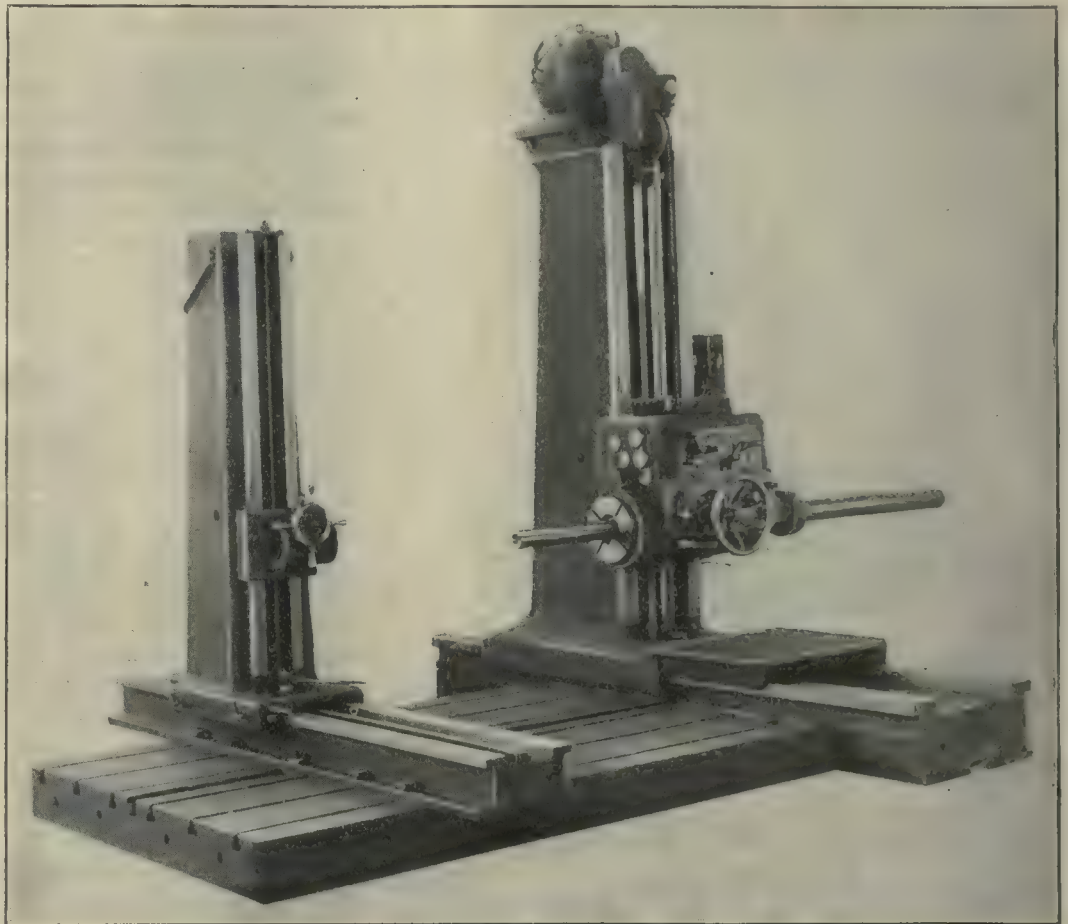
HORIZONTAL BORING, MILLING AND DRILLING MACHINE
